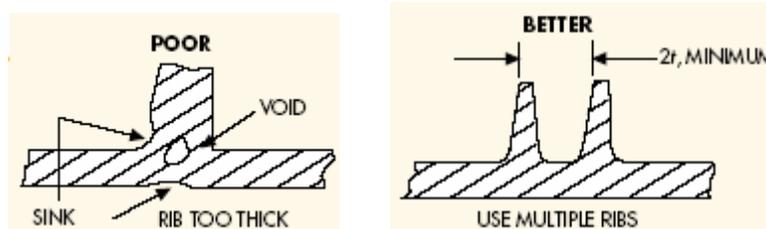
Molding problems (sink holes and voids) occur if the part has thick sections
